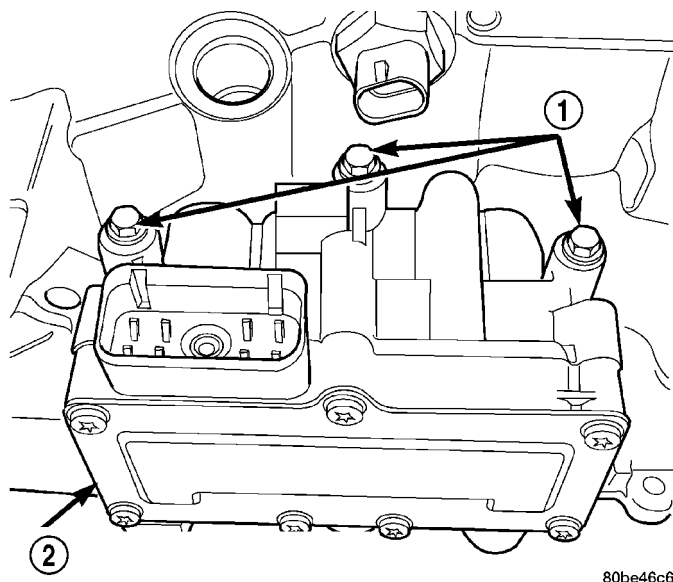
Solenoid Pack-to-Transaxle Bolts
